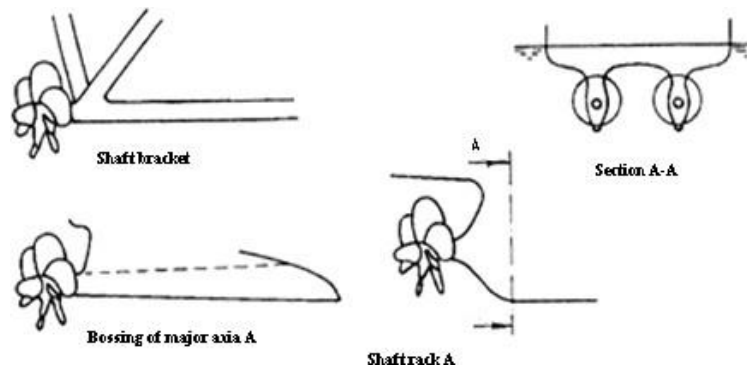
Shaft Bracket, Shaft Rack and Bossing of Major Axis
